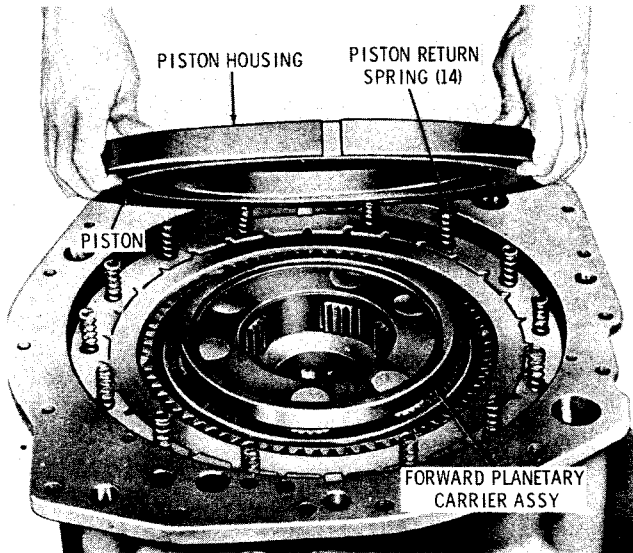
Removing forward clutch piston housing (5630 models)
